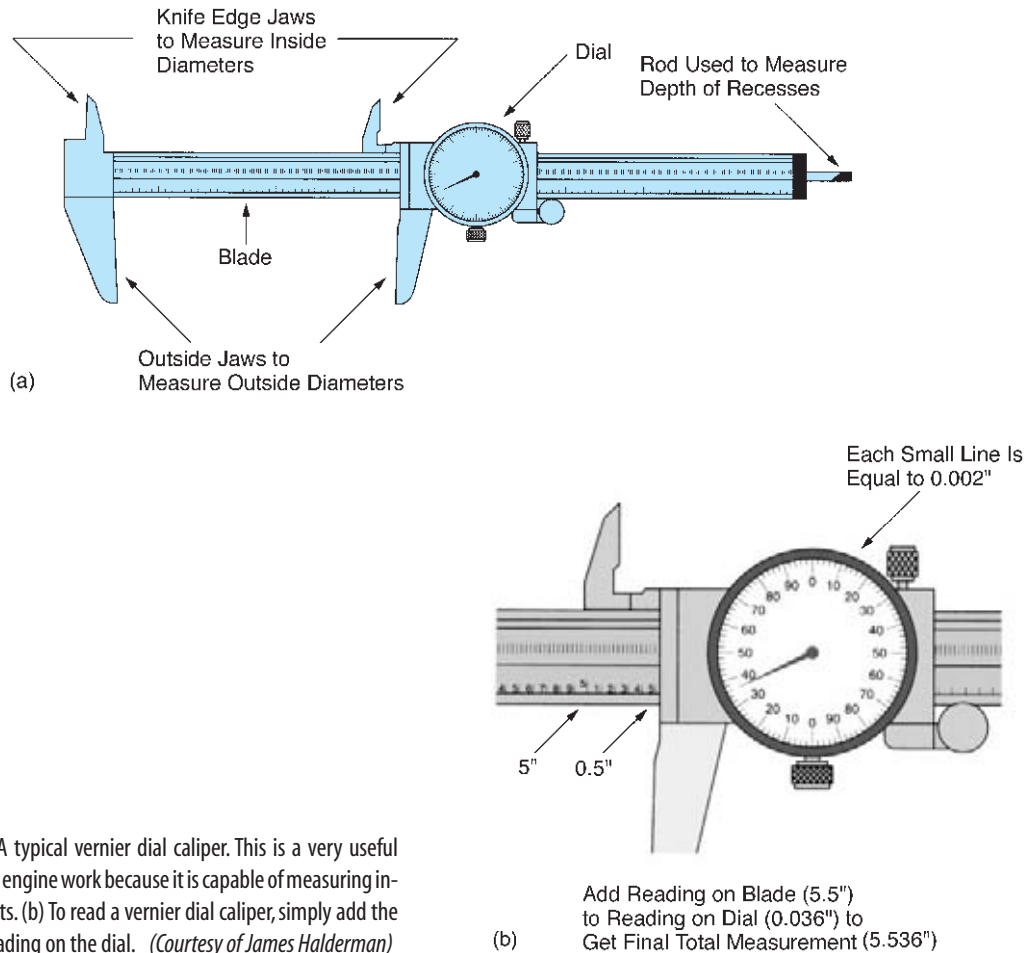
(a) A typical vernier dial caliper. This is a very useful measuring tool for automotive engine work because it is capable of measuring inside and outside measurements. (b) To read a vernier dial caliper, simply add the reading on the blade to the reading on the dial. (Courtesy of James Halderman)
